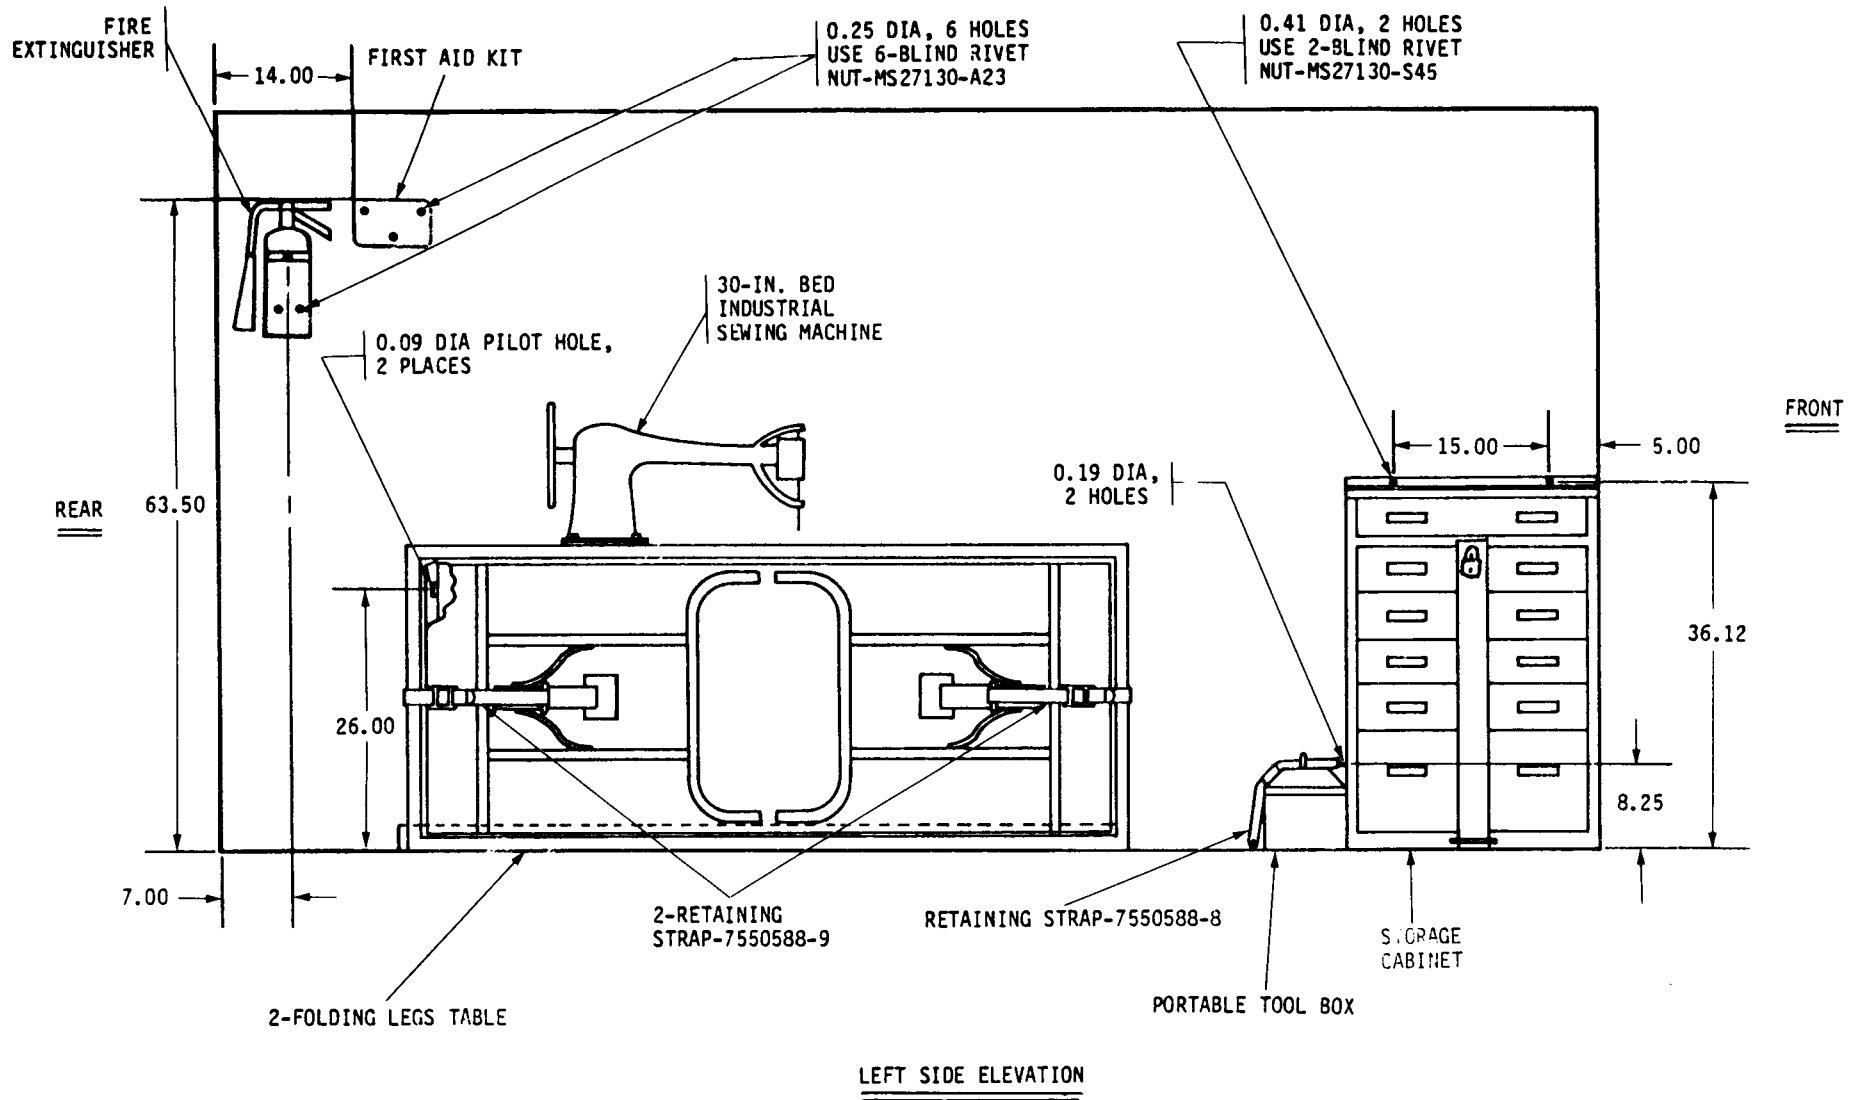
Components to be Mounted, Unit 1, 280, Left Side Elevation.
